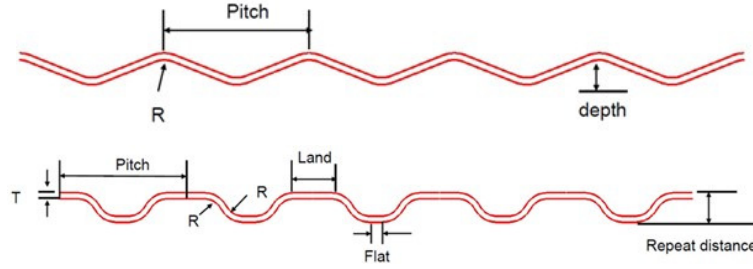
The schematic drawings : (a) 1st line : preform forming tool and (b) 2nd line : conformal final forming tool.
